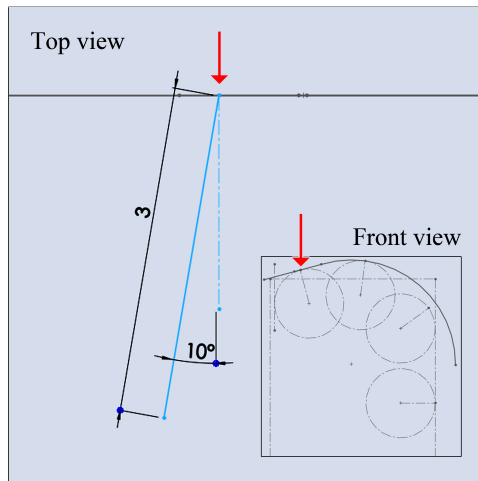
2D sketch of vector specifying 10° side rake for the center cutter. Red indicators mark the same point on the sketch from a top and front view. Dimension in mm.
